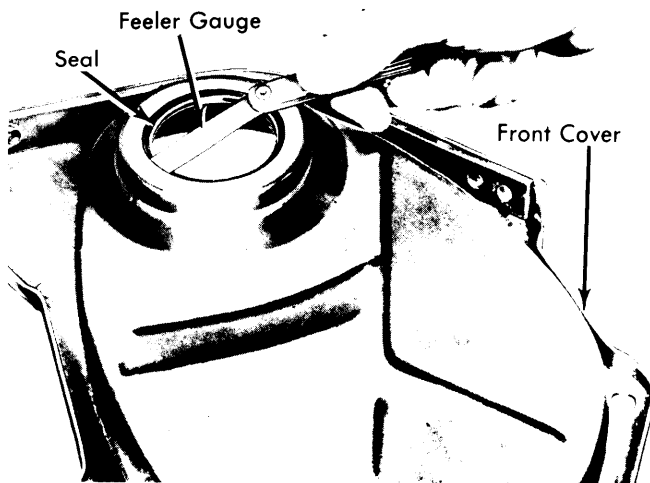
Using Feeler Gauge to Check Front Cover Seal Installation
